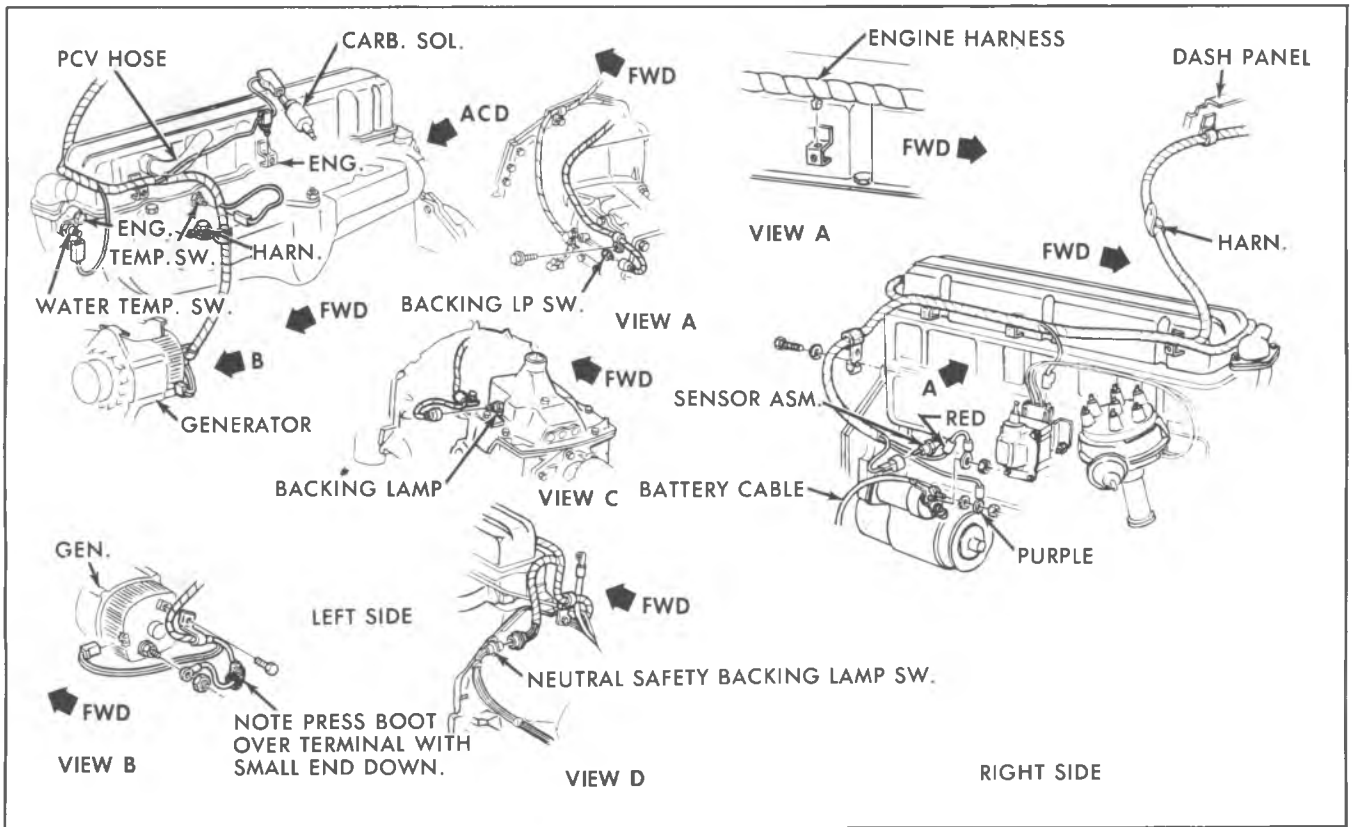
P-10 thru 30 Truck L-6 (L25) Engine Wiring
